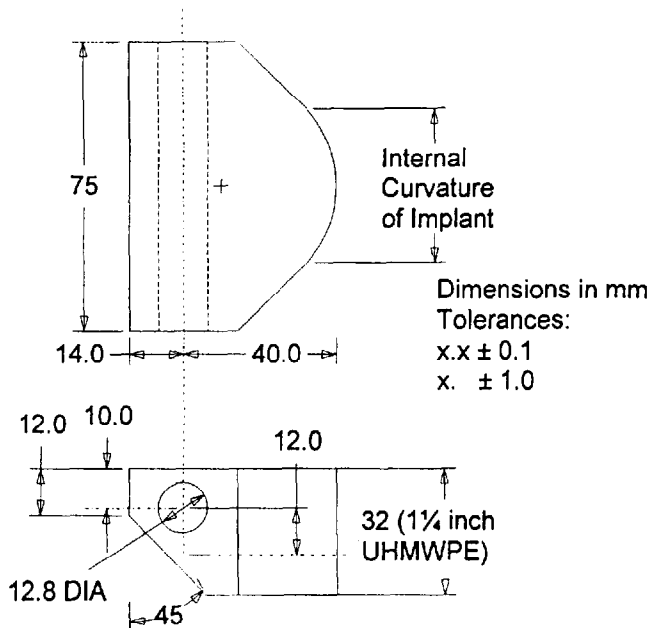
Lumber Unilateral UHMWPE Block For Screws or Bolts
